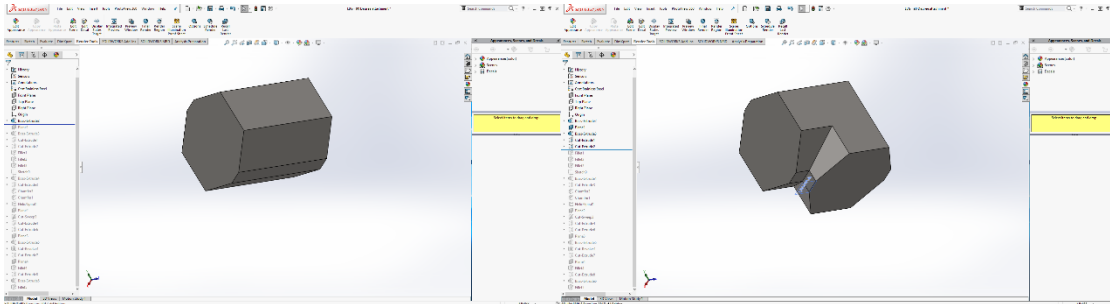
AC901616: CAD Drawing (Stages 1 & 2)
